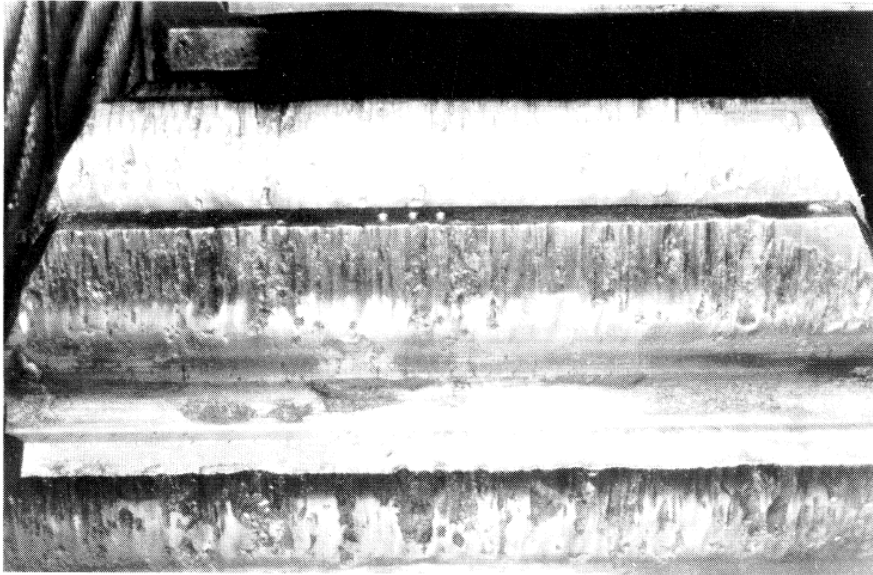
Cold Scuffing Damage to Gear Tooth [27]
